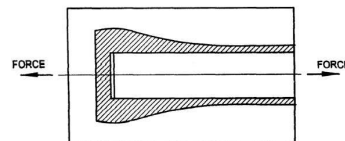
END FILLET WELD NORMAL TO DIRECTION OF FORCE
